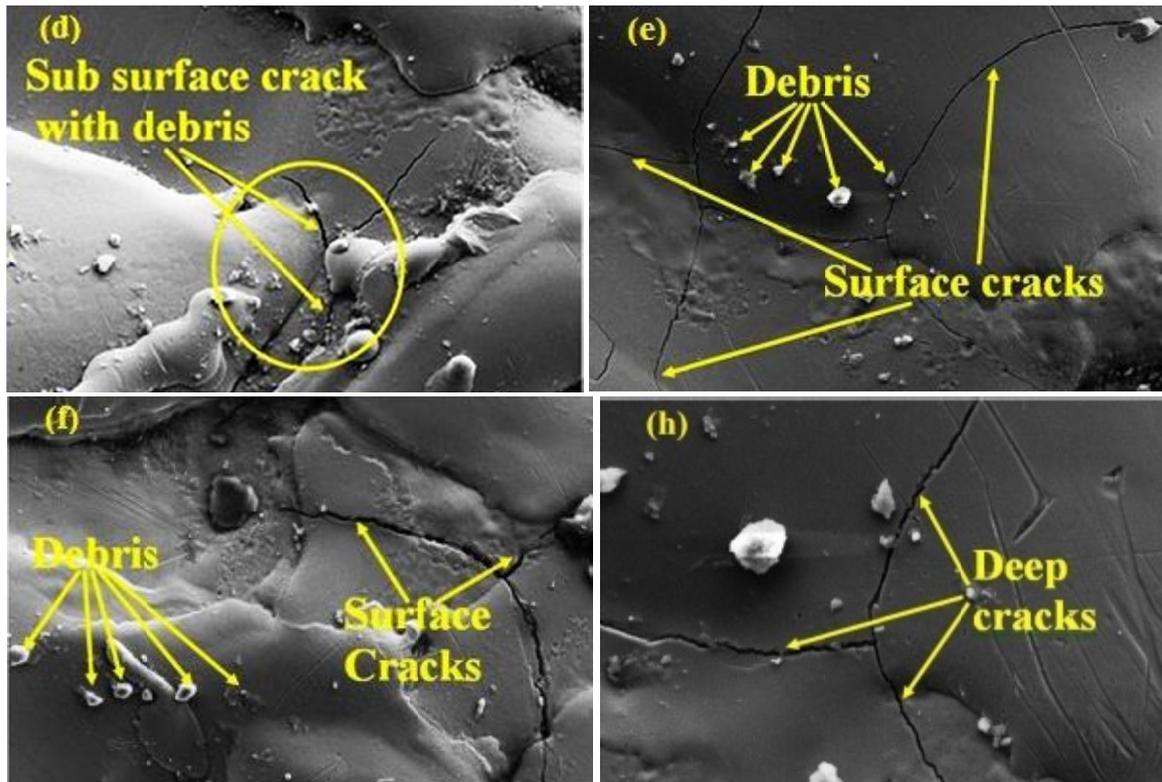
SEM graphs of Inconel 800 specimen machined by EDM
